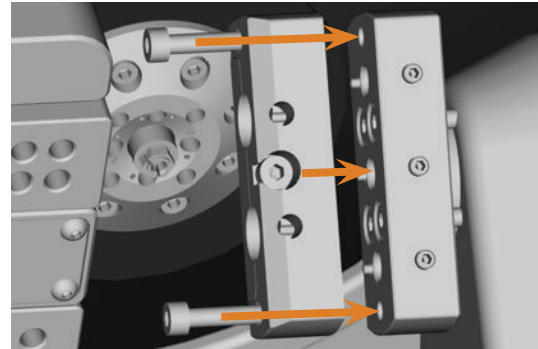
SCREWING IN THE ABUTMENT HOLDER
